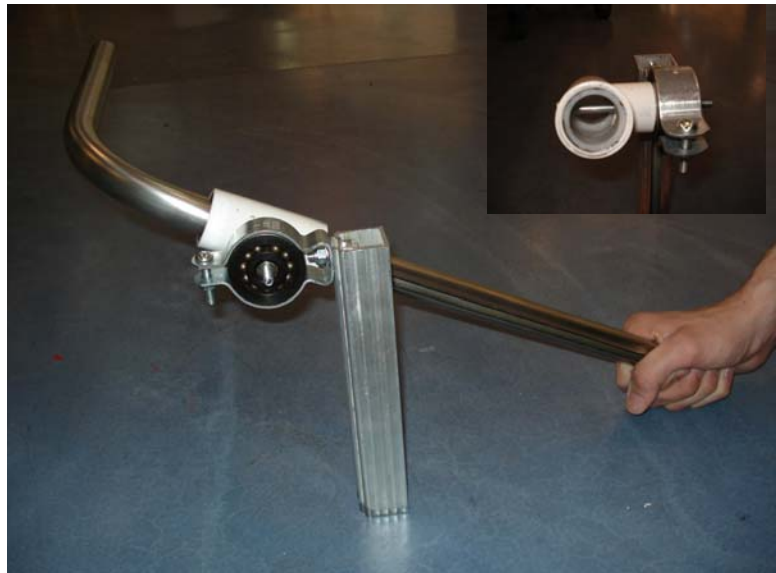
Sliding collar mounted to ball bearing (top). Collar mechanism with mounting rod (bottom).
